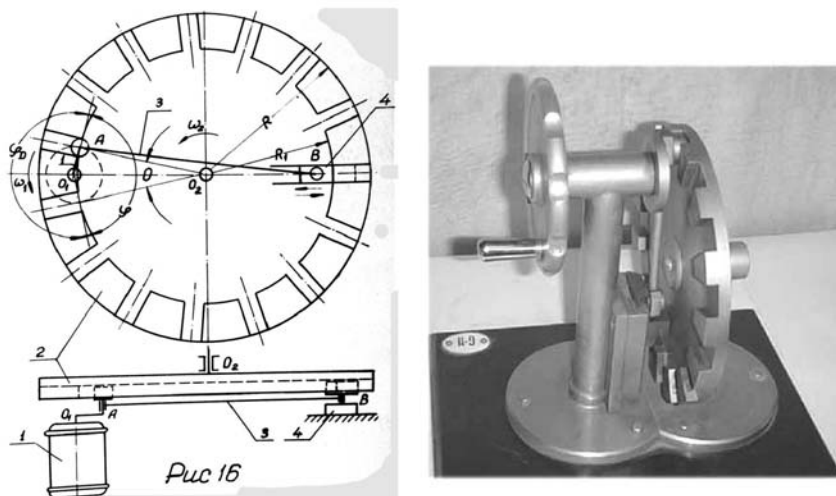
A multi-position Geneva cross-controller mechanism of an electric locomotive
